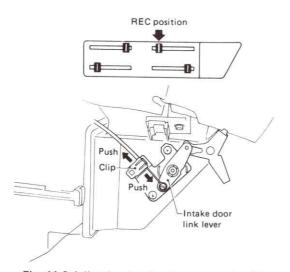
Adjusting intake door control cable (air conditioner models) (Sec 32)
